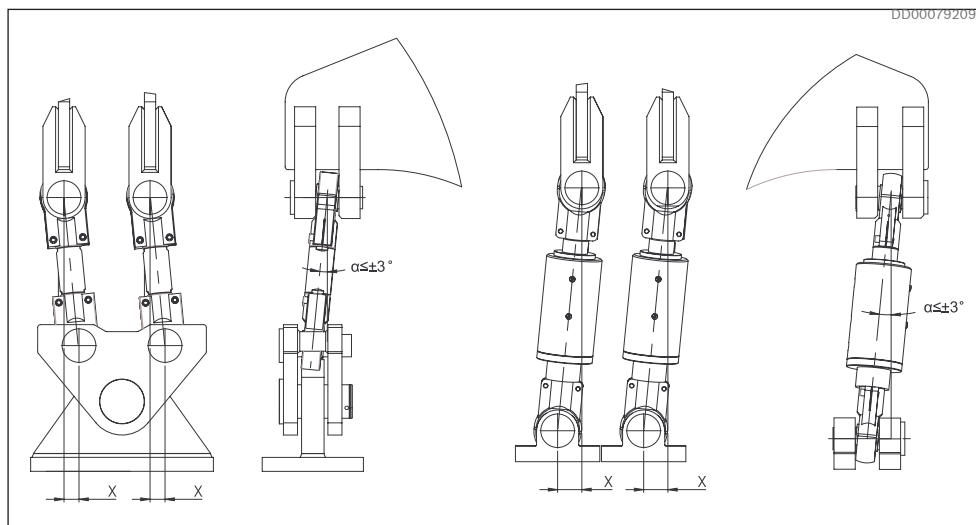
Installation instruction for articulated connection and hydraulic cylinder for DTCBM 4600 to DTCBM 6000
